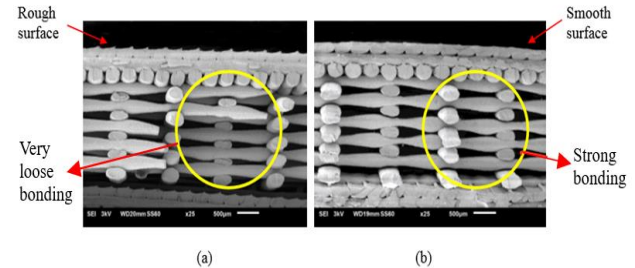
(a) Cross section of 3D printed part by normal 3D printer and (b) cross section of 3D printed part by inert gas assisted 3D printer.
